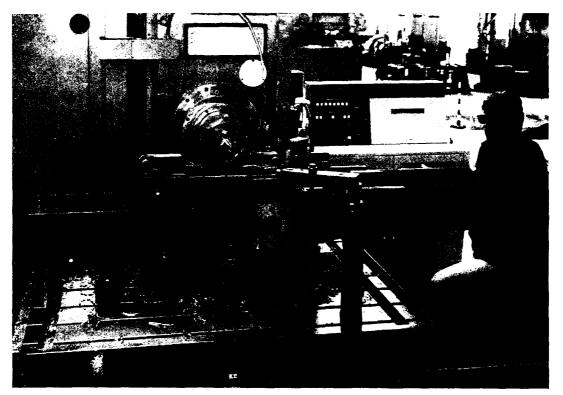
MOUNTING CRADLE BEING REAMED ON A CERUTI CN MACHINE
